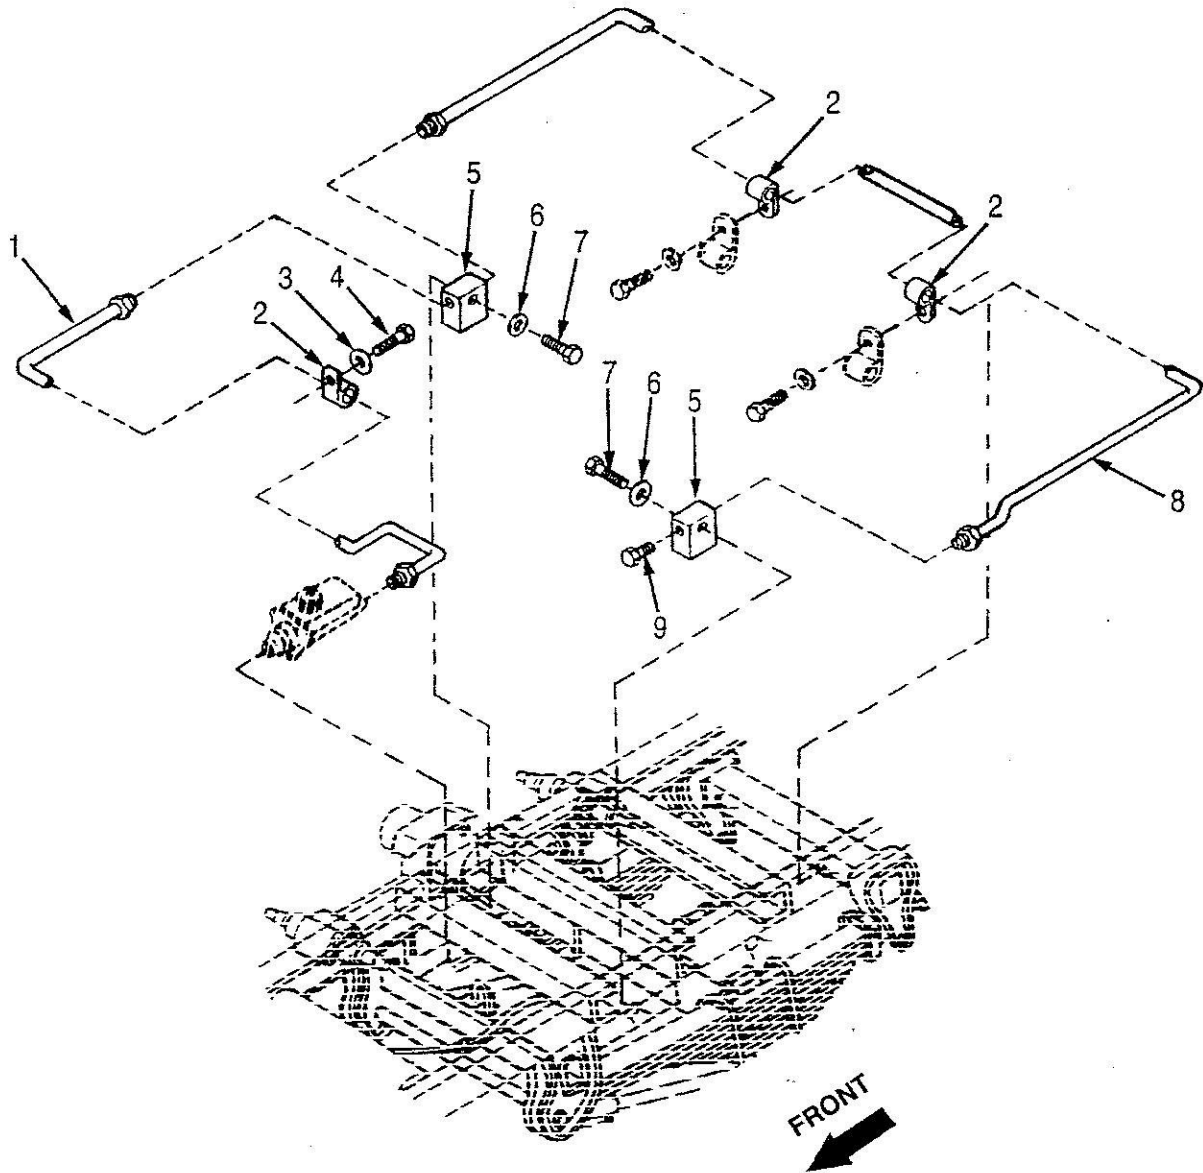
Rear Frame Brake Lines, Hoses, and Fittings
